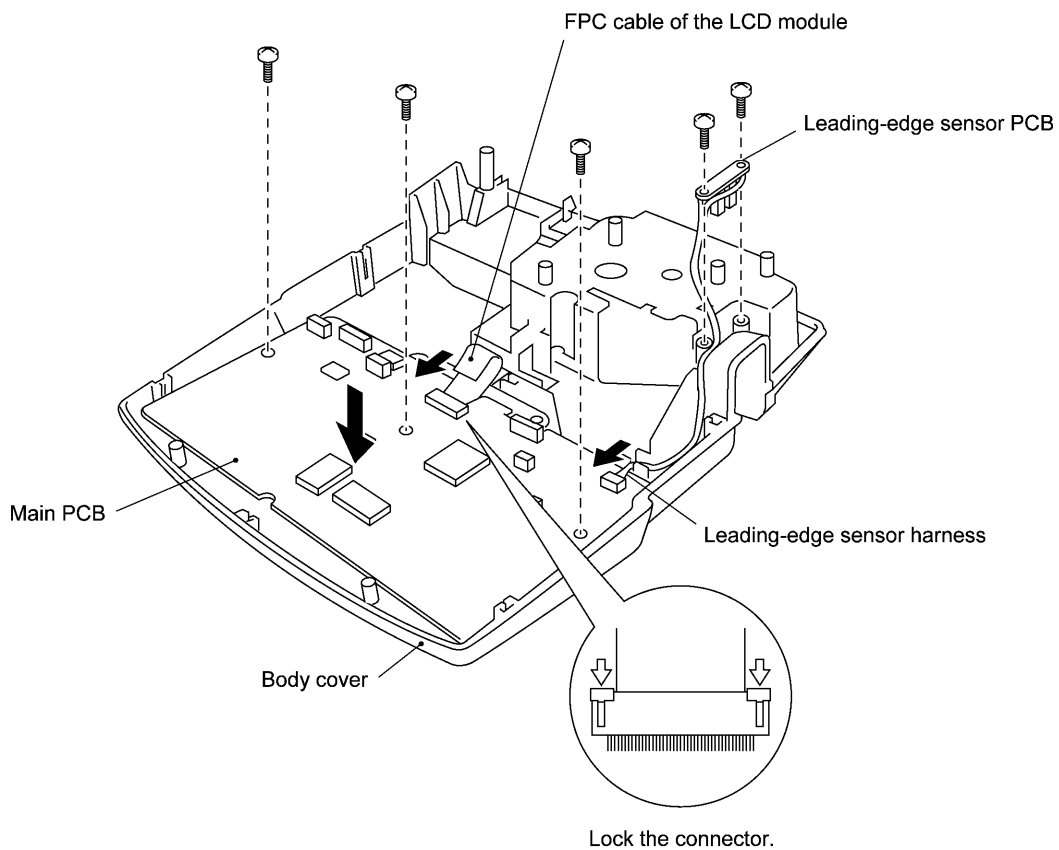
Installing the Leading-edge Sensor PCB and Main PCB
